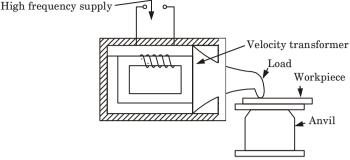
Typical setup for ultrasonic welding arrangement.
